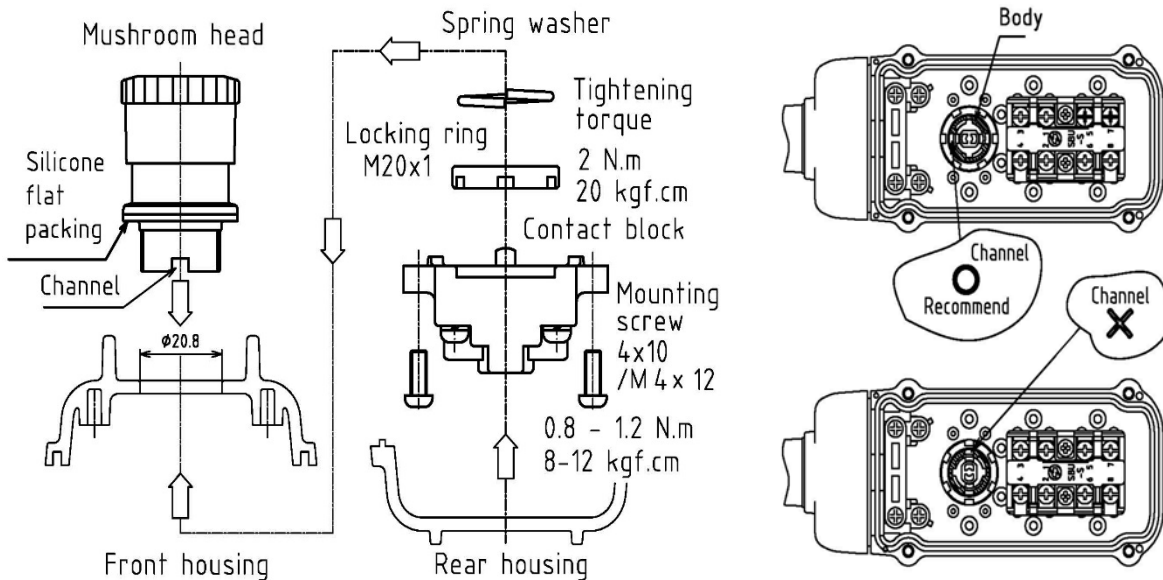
Cross-section and Top View of E-Stop Switch Installation
